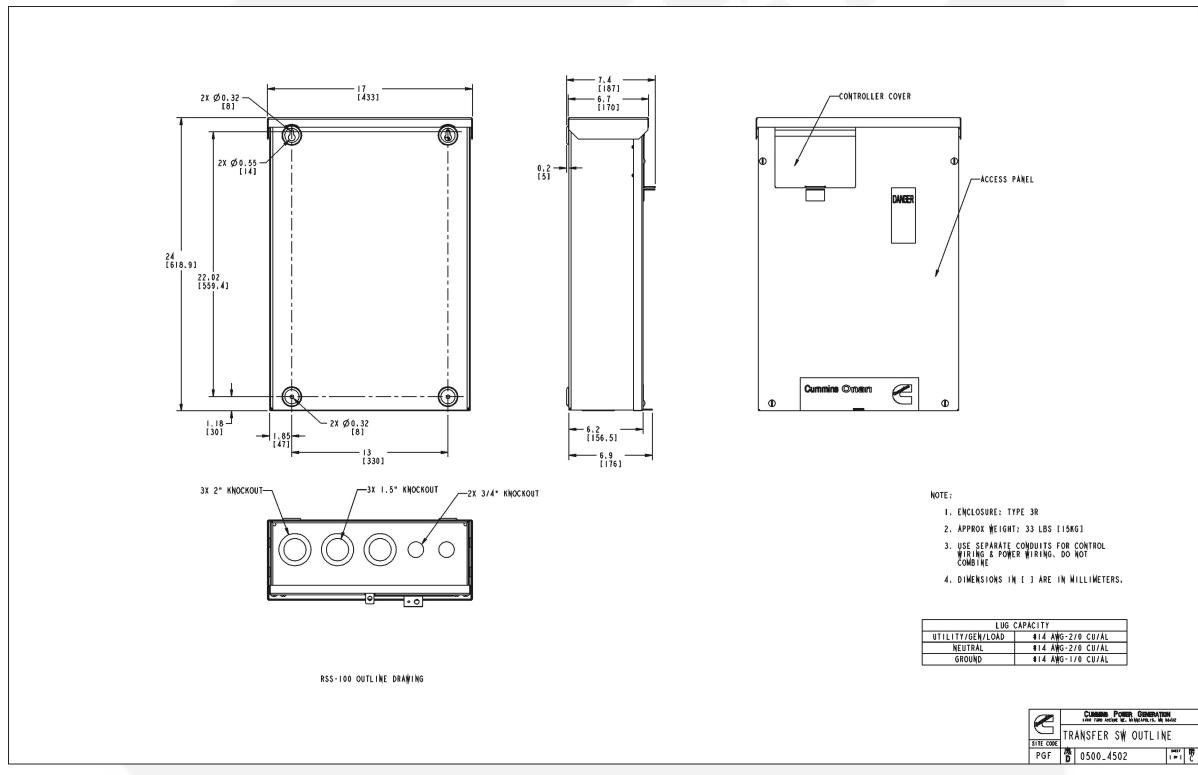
RSS100 CONTROL BOX OUTLINE DRAWING WITH CONTROLLER
